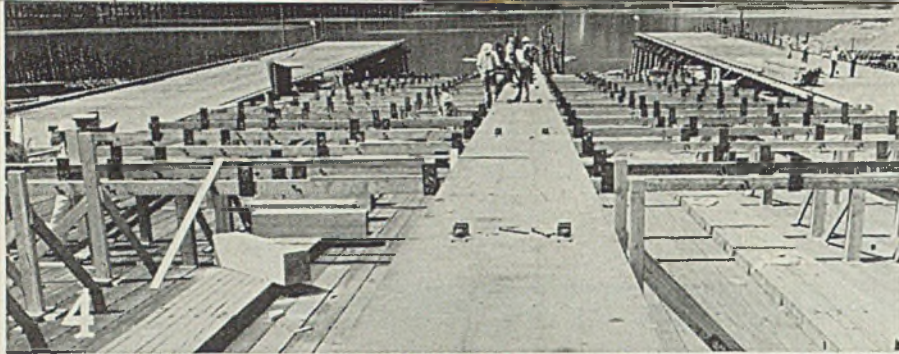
Welding a keel plate. Keel is not what it used to be since now it is a series of flat plates. It will have vertical members welded to it, forming the background of the ship
